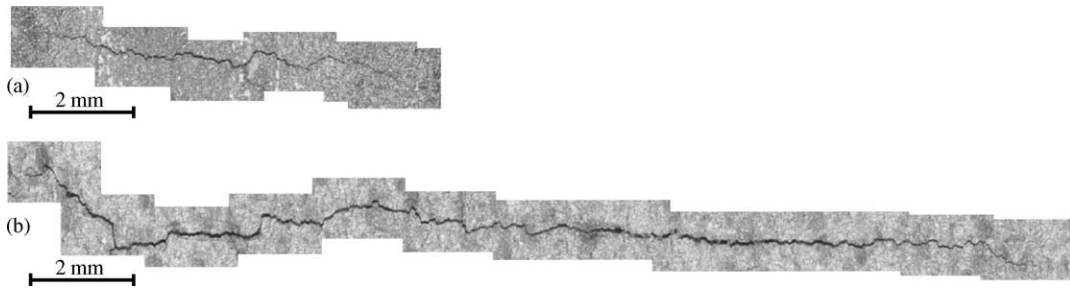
Two surface breaking thermal fatigue cracks: (a) surface length approximately 8 mm (30,021 thermal fatigue cycles) and (b) surface length approximately 20 mm (166,971 thermal fatigue cycles) in AISI 304 type austenitic stainless steel plate.
